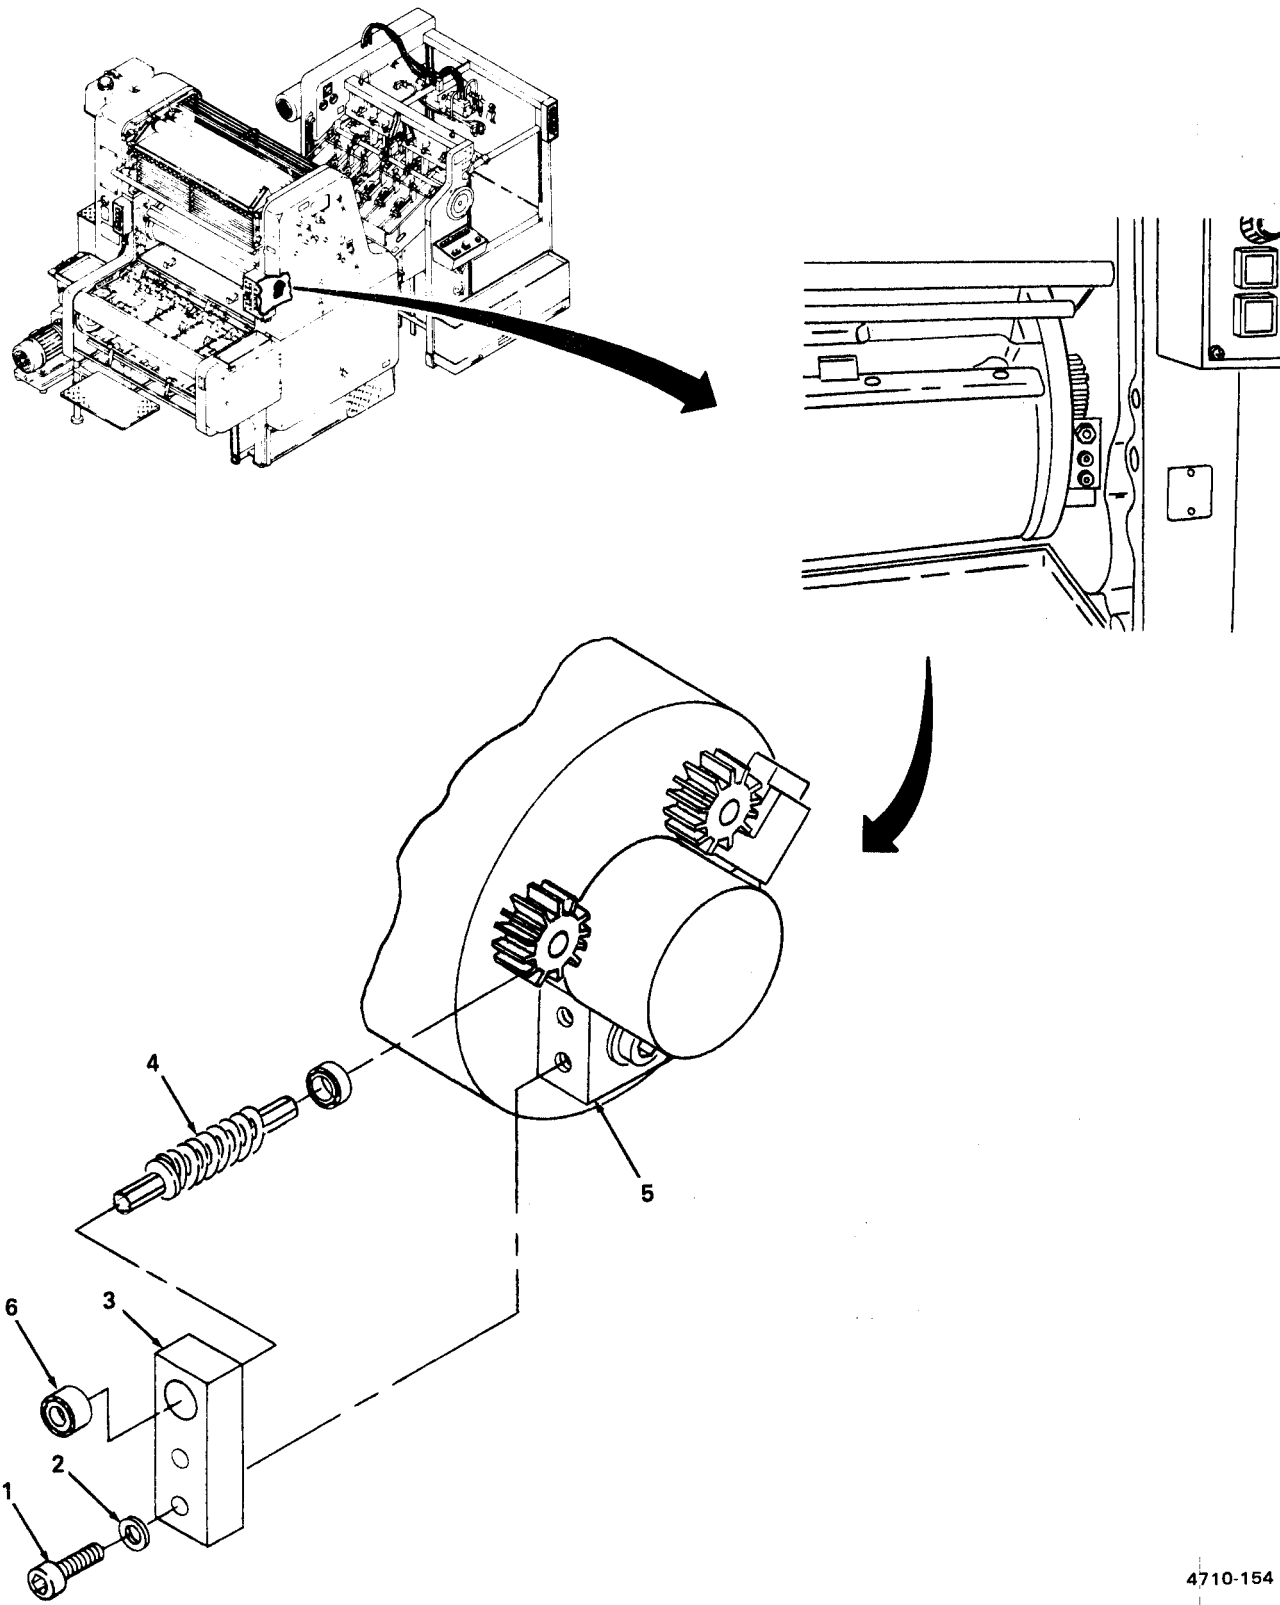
Blanket Cylinder Adjustment Assembly Repair.
